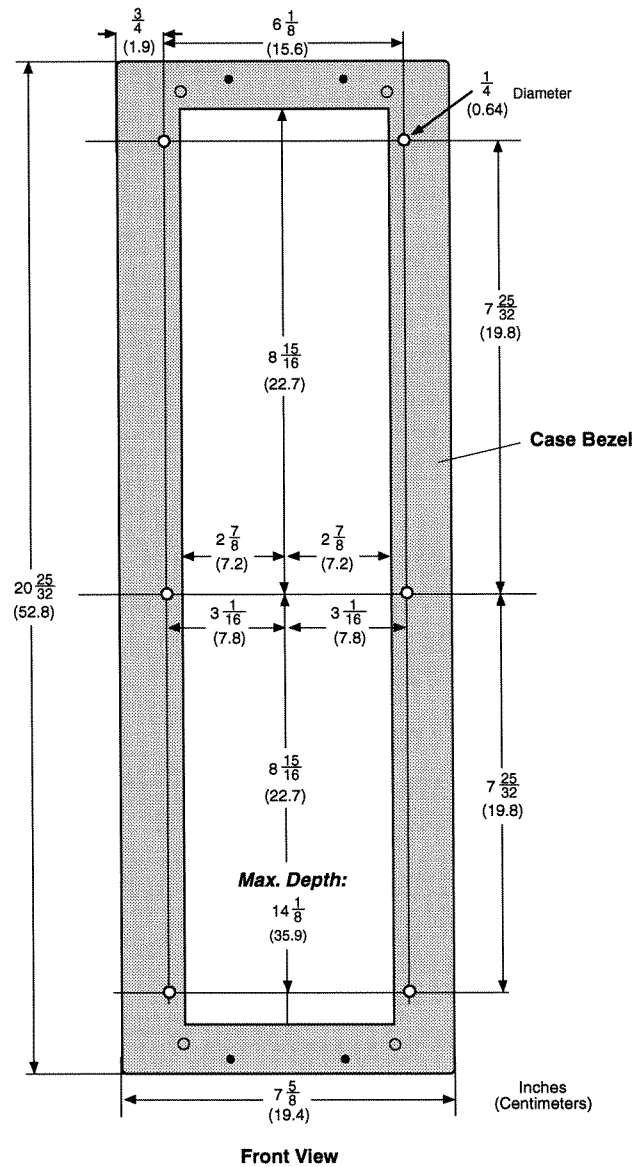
Mounting Dimensions for GE L-2 Cabinet
